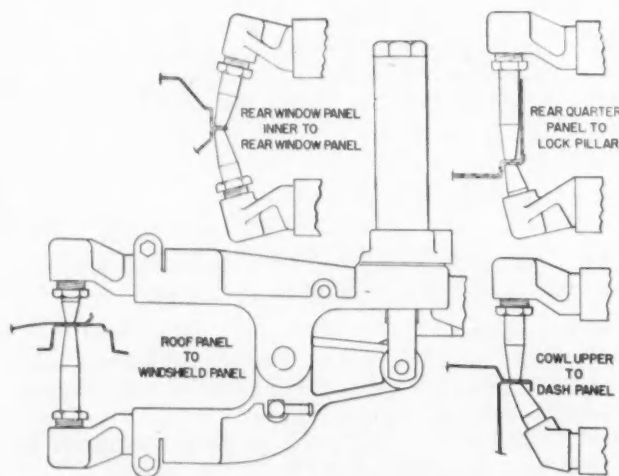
Variety of jaw extensions used on the portable welding gun
